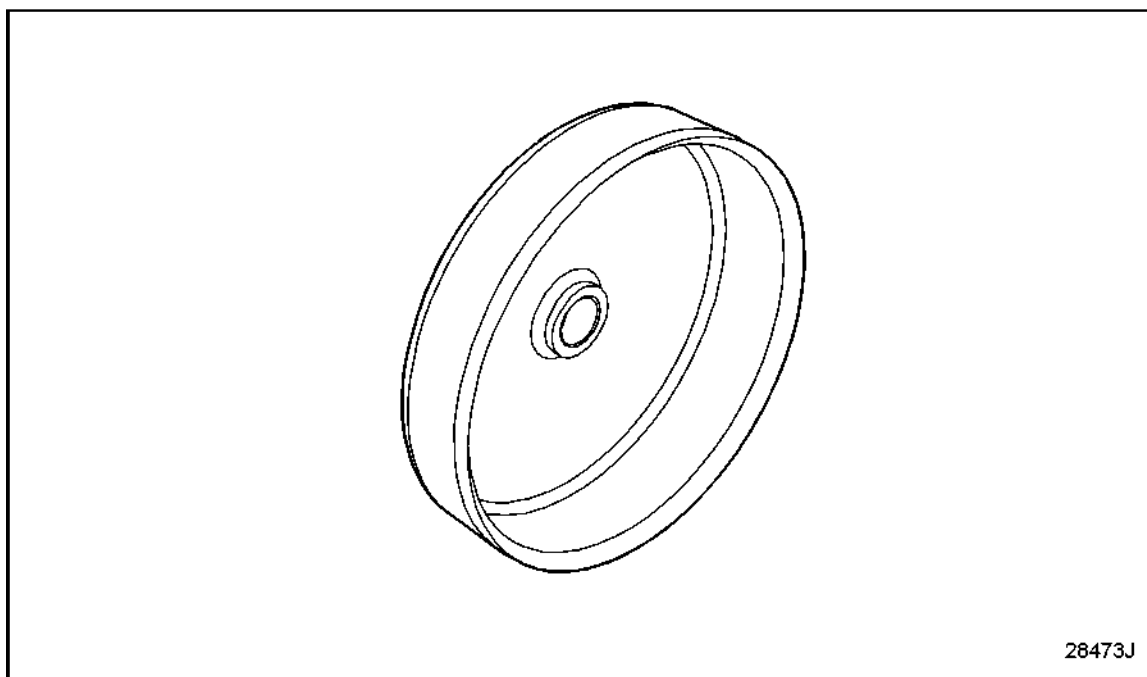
Rear Seal Expander (Standard Seal),J 22605
